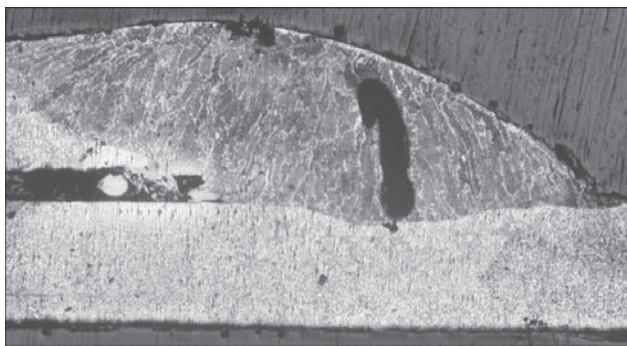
Macrostructure of overlap joint of galvanized steel produced by MAG welding
